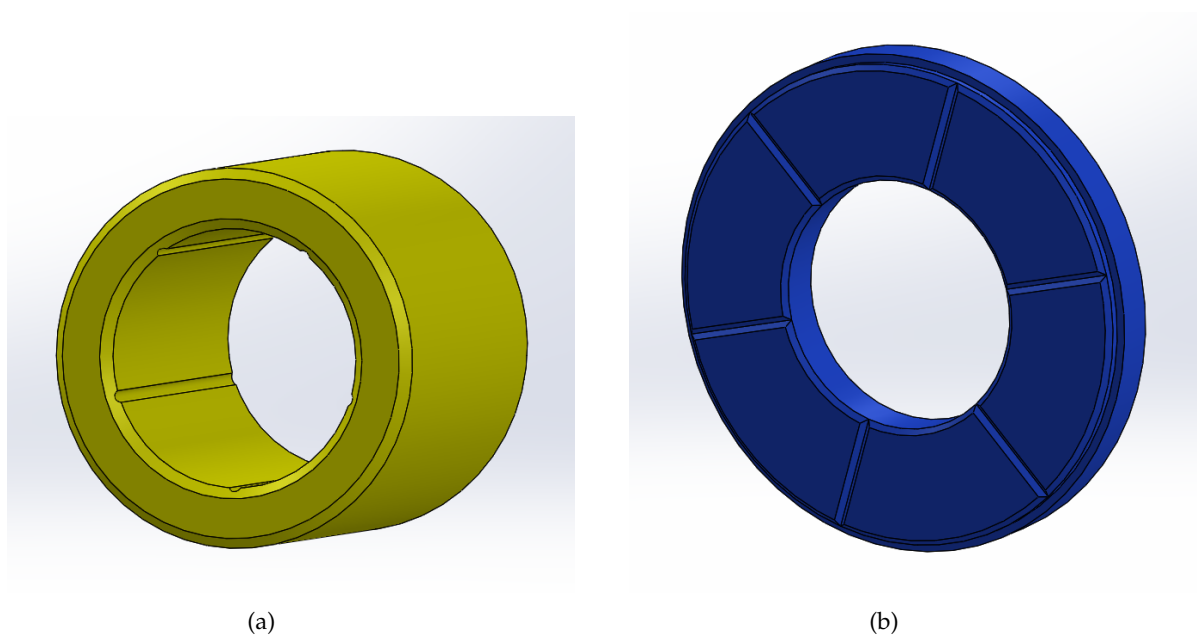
CAD renders of a. journal bearing and b. thrust bearing of the 3.0m RRES.
